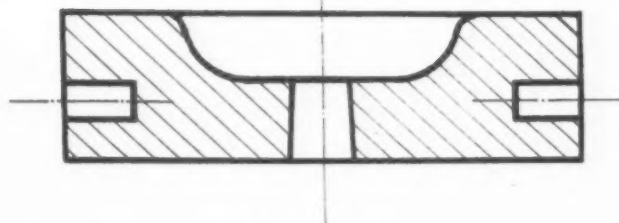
Ingot Mold Stool Used in Bottom Pouring of Large Ingots. Material: Cast Iron or Cast Steel
